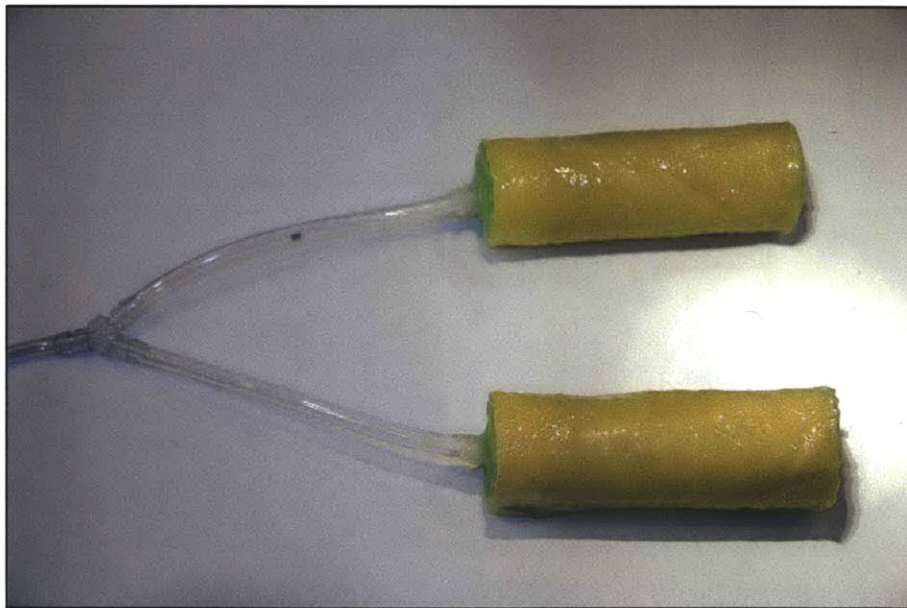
Prototype jammable soft jaws used to hold odd shaped parts securely in a vice.
